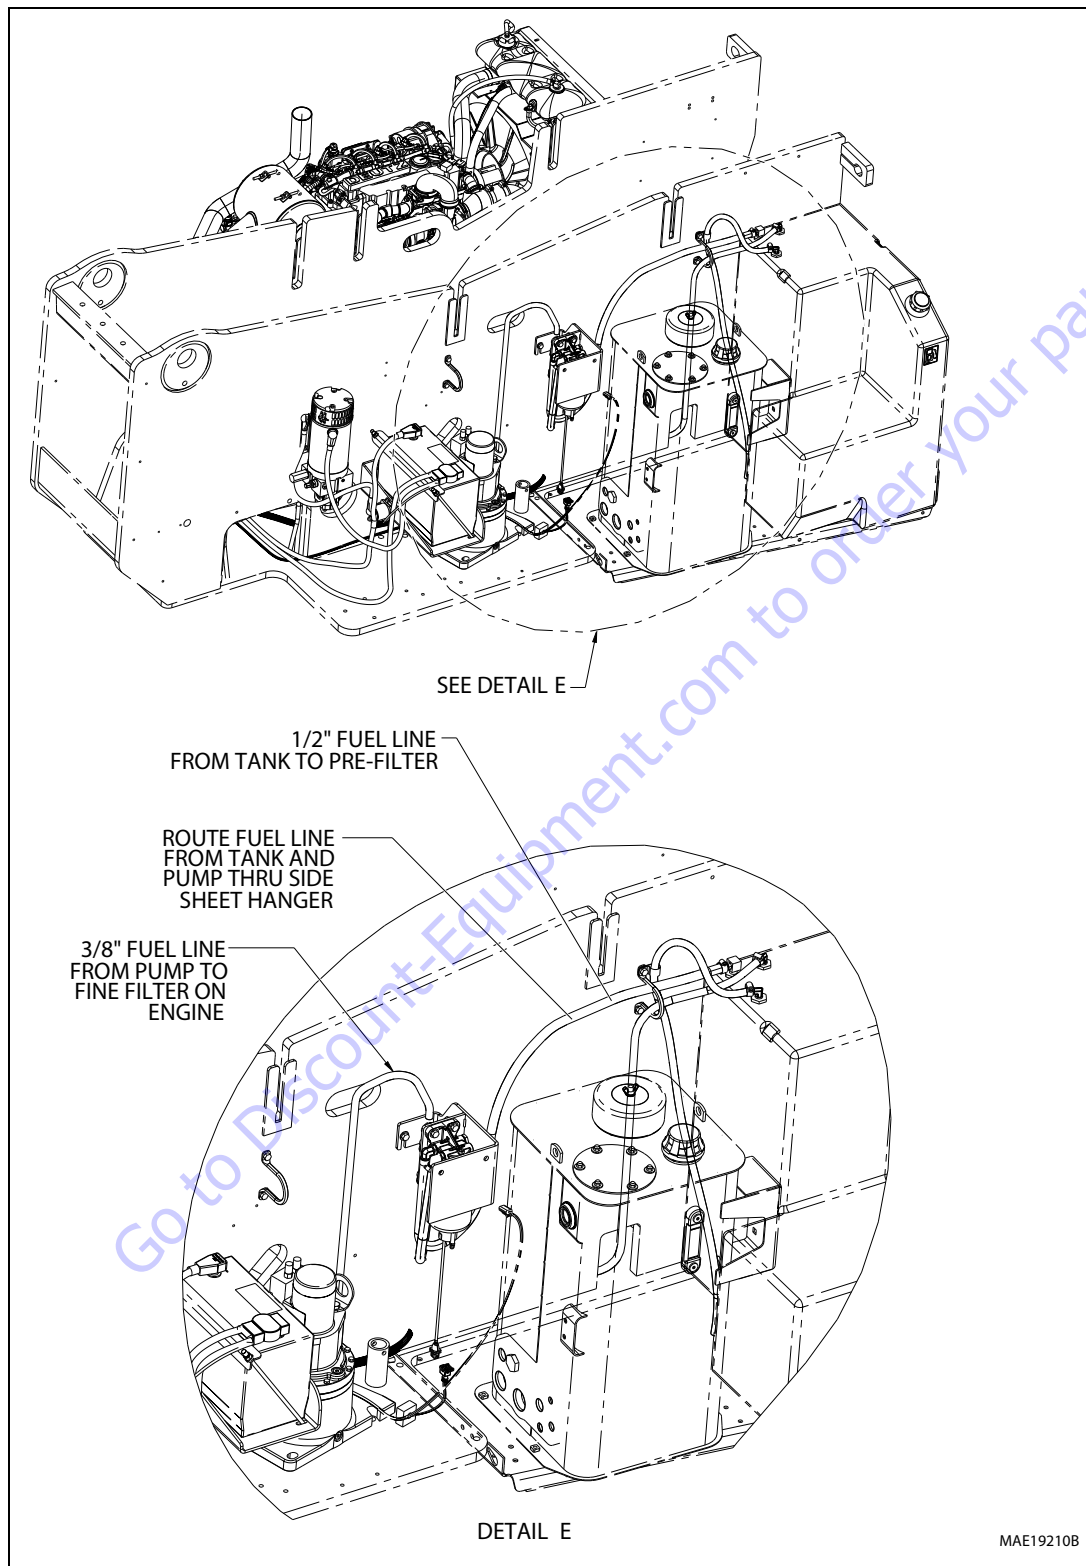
Deutz TD2.9L4 China III Engine Installation - Sheet 5 of 7
